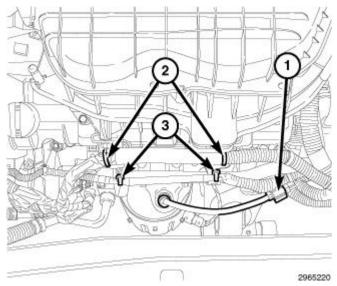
Left Upstream Oxygen Sensor Connector, Upper Wire Harness Retainers & Lower Wire Harness Retainers
